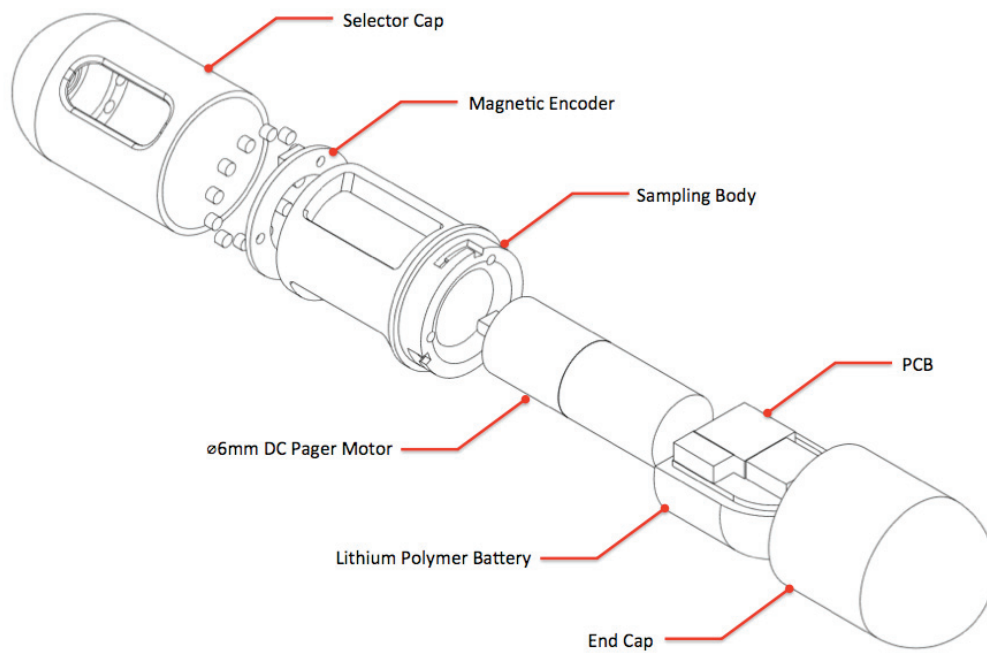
Exploded component view of GI sampling device (Embodiment A)
